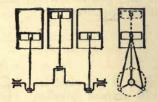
Three-cylinder Engine, with cranks at 120 degrees.
